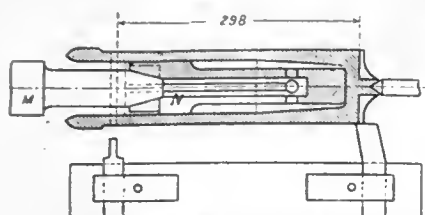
MACHINING BASE AND CUTTING TO CORRECT LENGTH.
